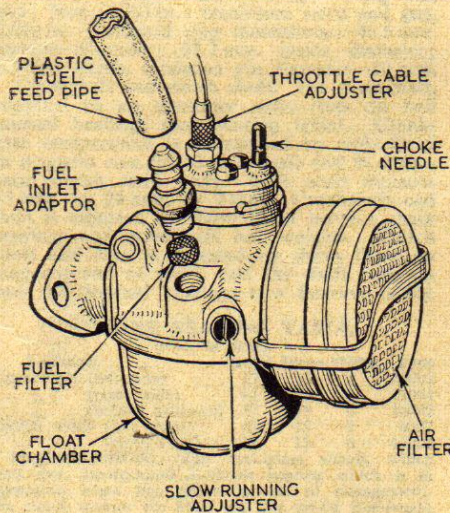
Exploded diagram of the carburettor on the Phillips Panda moped
